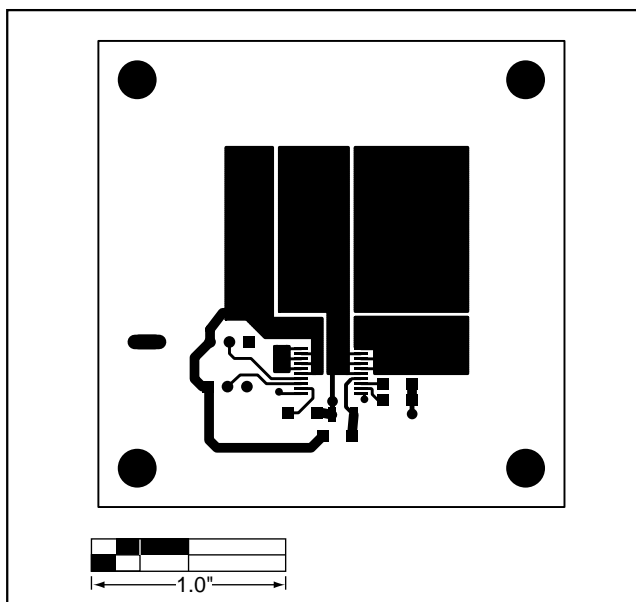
MAX1623 EV Kit PC Board Layout—Component Side
